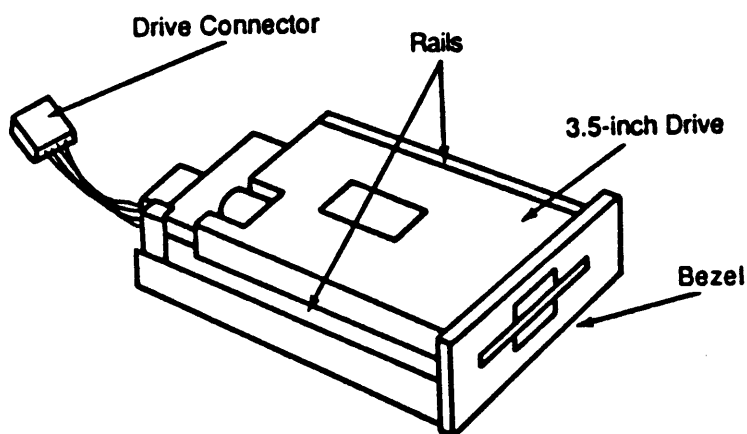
Installing a 3.5-Inch Disk Drive in a 5.25-Inch Mounting Frame
